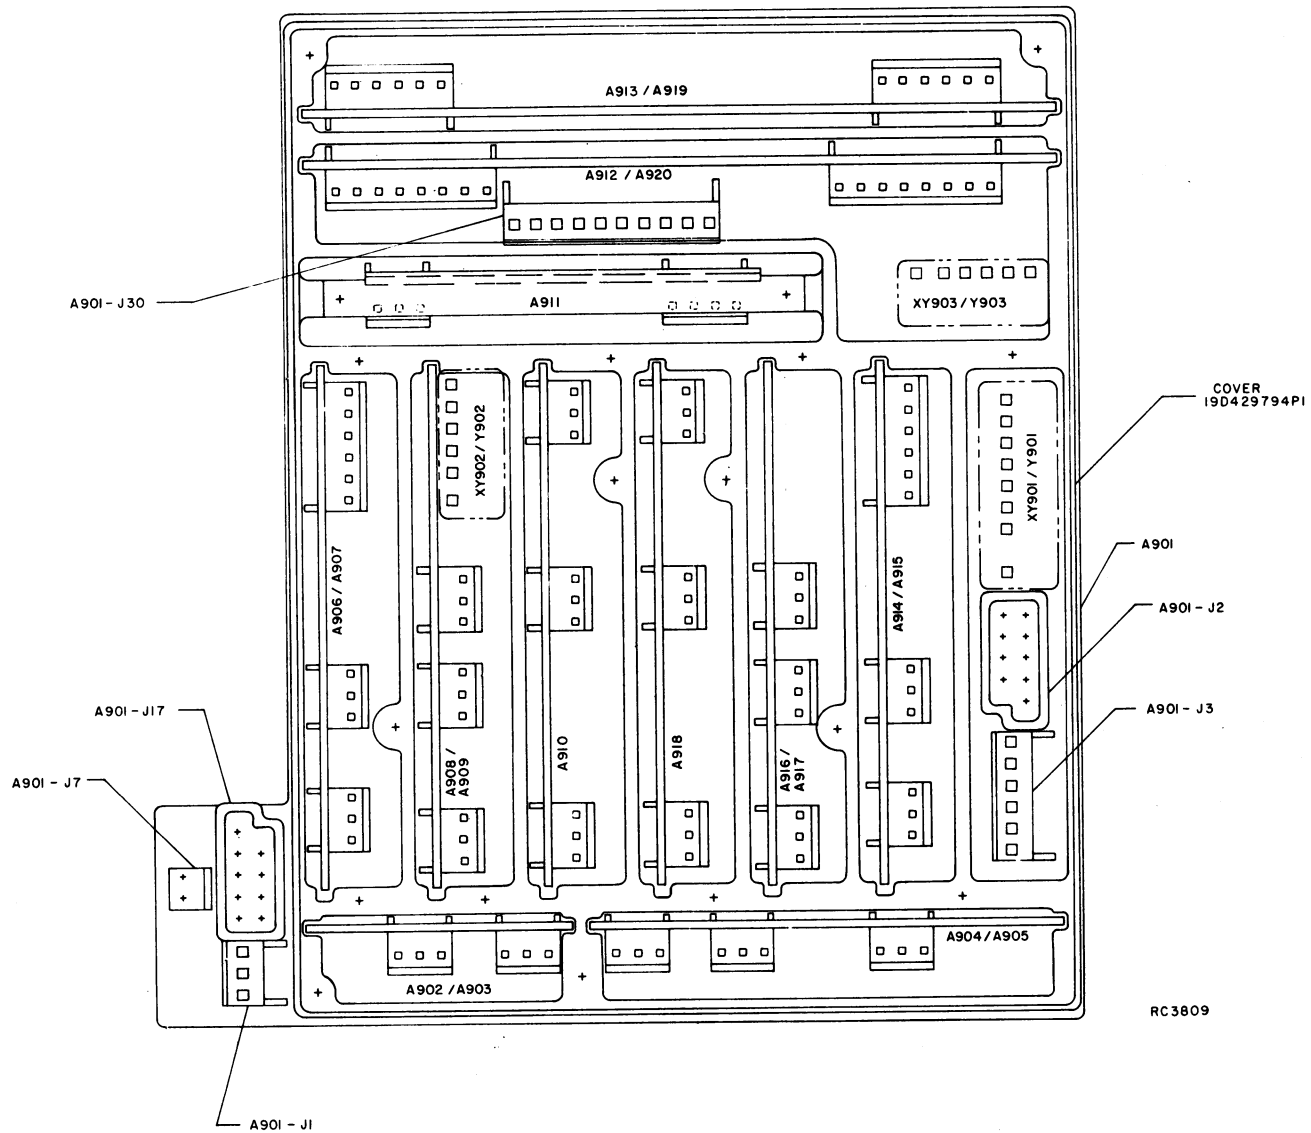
Mother Board A901 Plug-In Board Lay-Out
